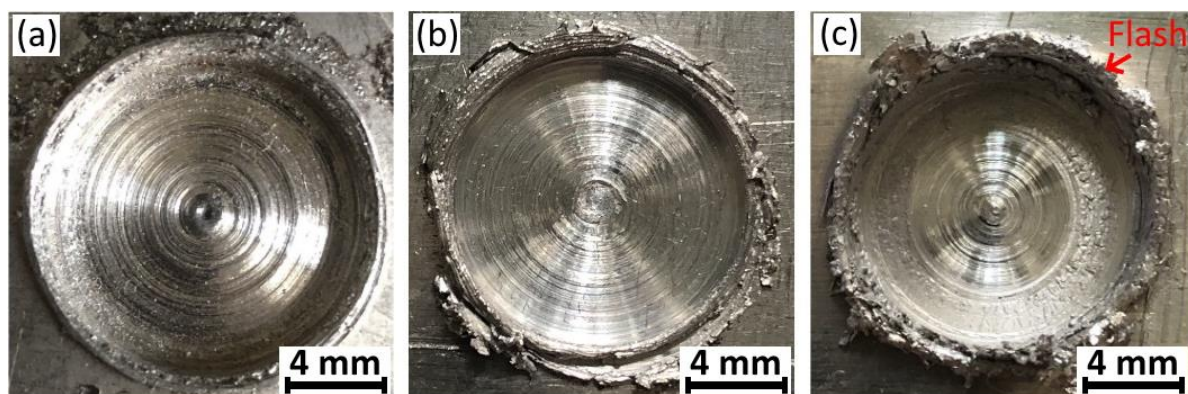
Surface appearance of welded samples at various tool penetration depths, (a) 0.25 mm, (b) 0.35 mm and (c) 0.45 mm.
